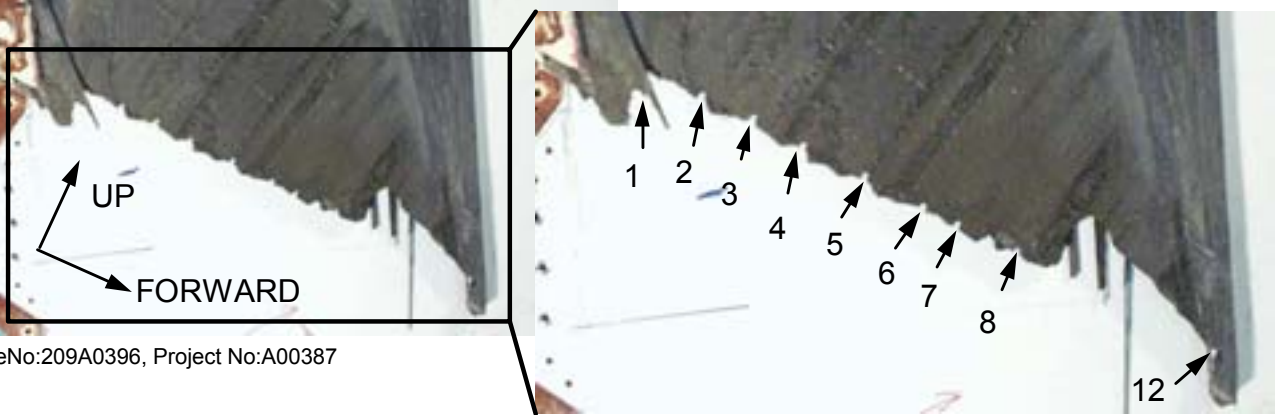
The interior surface of the vertical stabilizer skin section at the left aft lug fracture area after cutting from the upper skin panel piece. Inset photograph shows the numbered rib 1 fastener holes.
